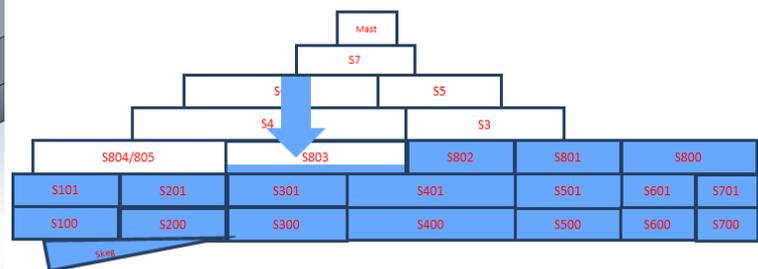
Hull stage when the equipment is loaded in the engine room with a building hatch in the main deck
